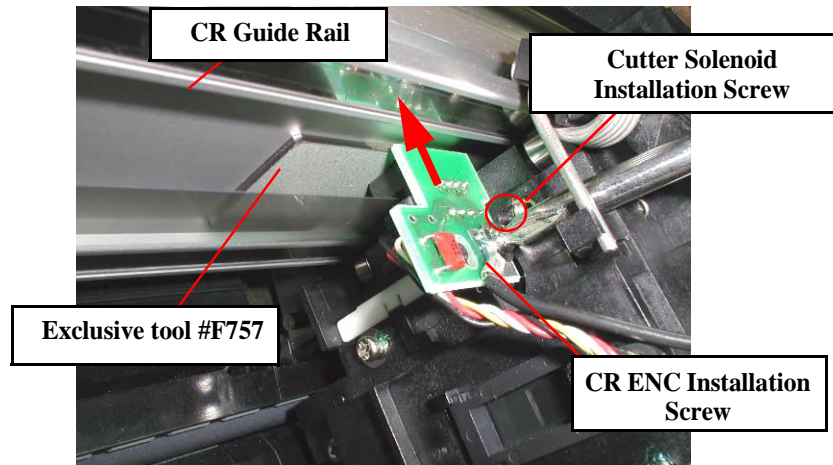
CR Encoder Sensor Installation Position Adjustment
